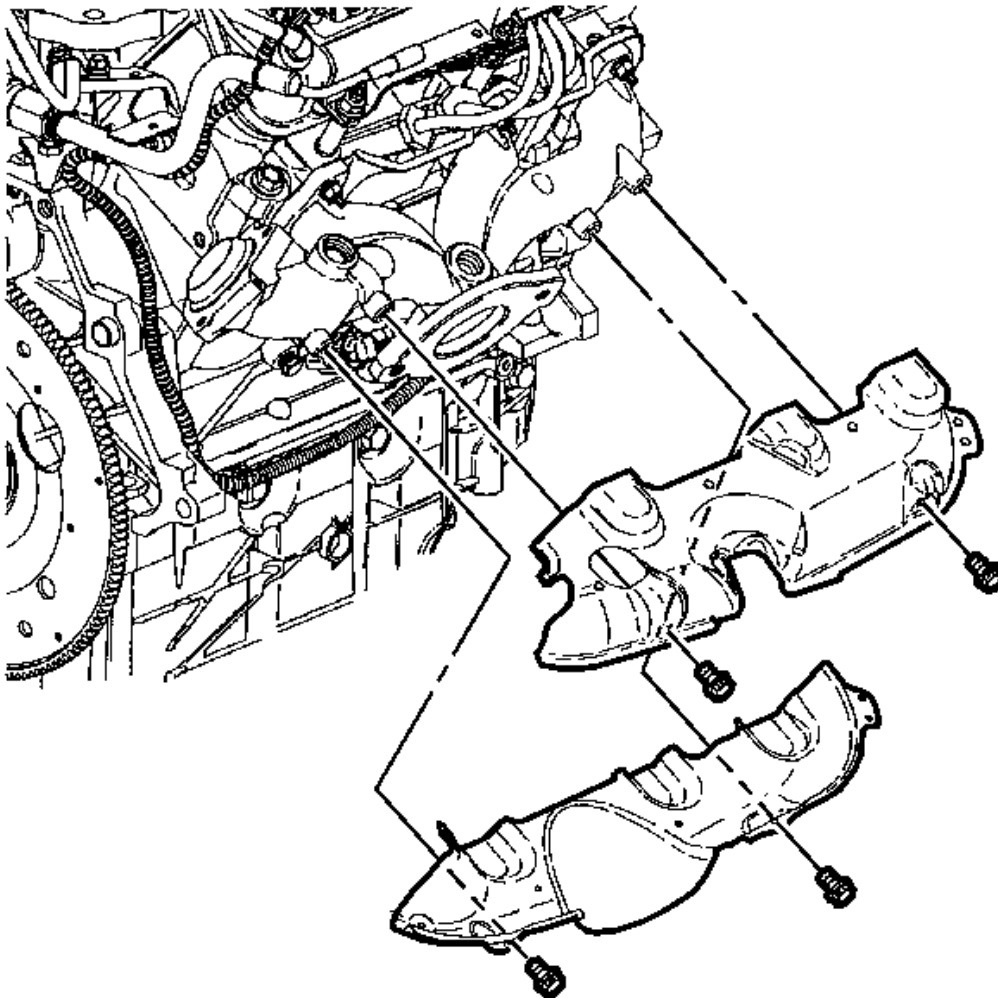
View Of Right Exhaust Manifold Heat Shields & Bolts
